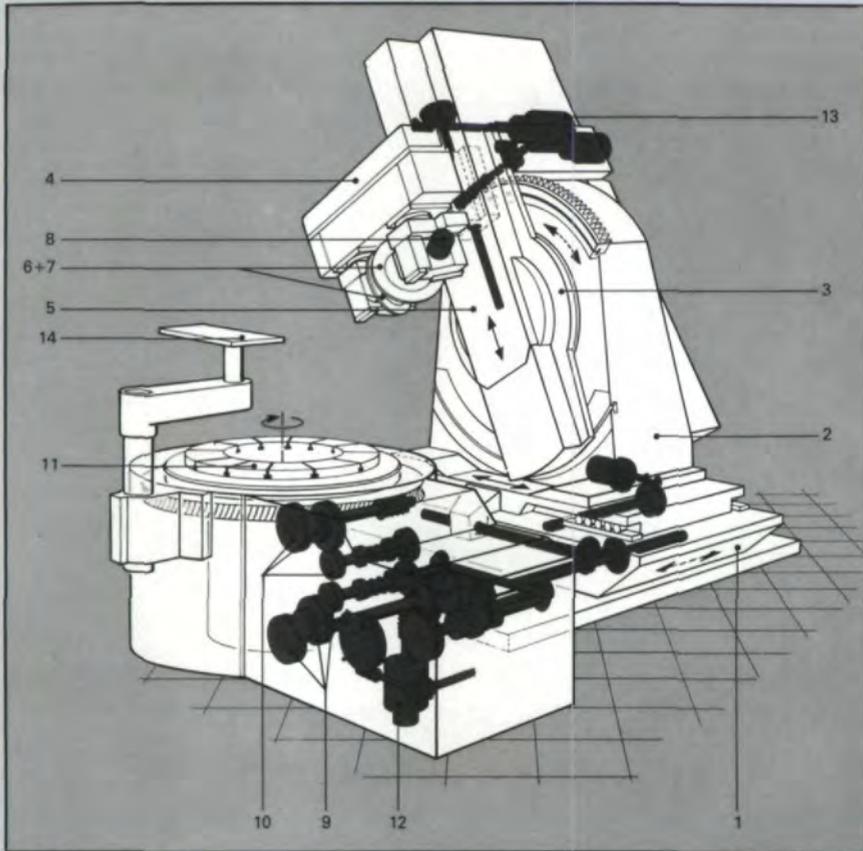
(Upper left) Kinematics of saucer-shaped wheel gear grinding machine, grinding wheels set to pressure angle of the gear.
